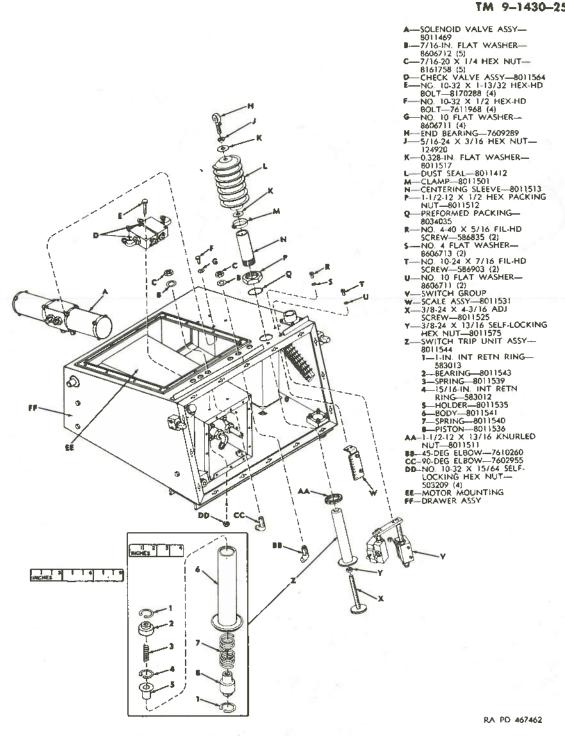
Hydraulic control unit—partially exploded view No. 2.
